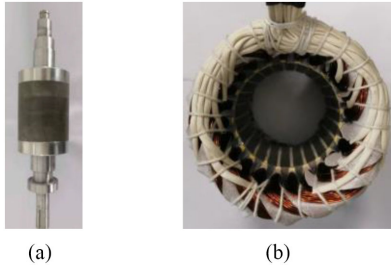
Prototype 4-pole/24-slot flat-type IPM motors. (a) Flat-type rotor. (b) Stator.
